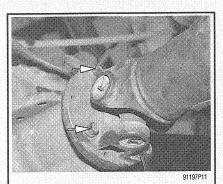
Remove the bolts retaining the rear driveshaft yoke-to-differential flange
